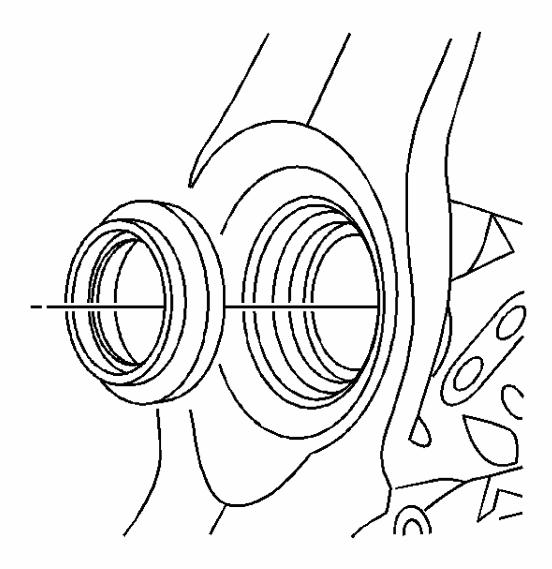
View Of Axle Shaft Seal & Bearing Courtesy of GENERAL MOTORS CORP.
